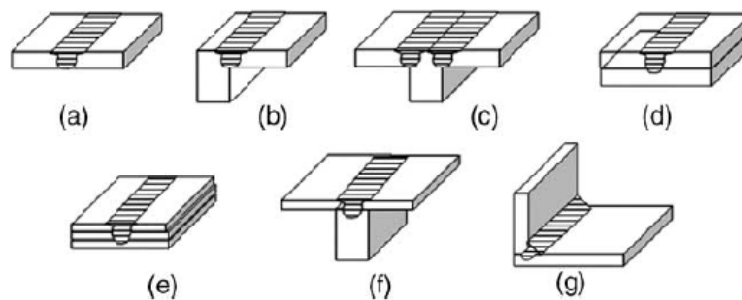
Joint configurations for friction stir welding: (a) square butt, (b) edge butt, (c) T butt joint, (d) lap joint, (e) multiple lap joint, (f) T lap joint, and (g) fillet joint [8]
